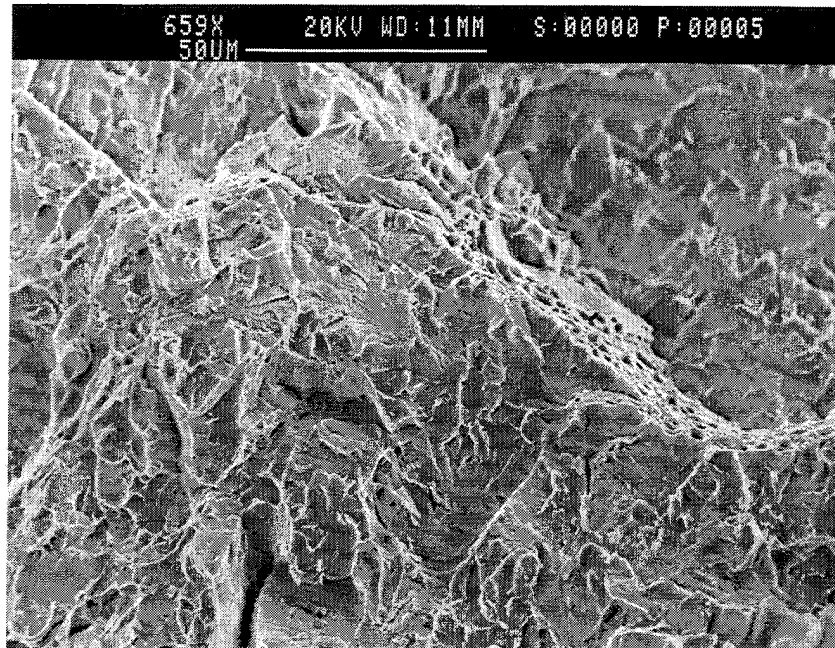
MV2 - GTA Weld Using Argon Cover Gas
